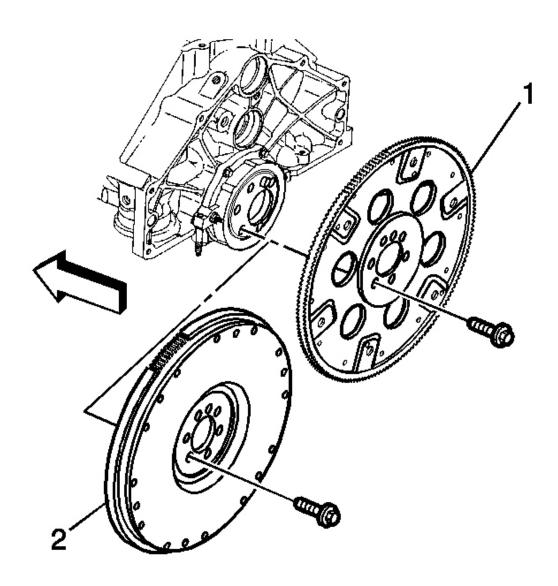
View Of Flywheels Courtesy of GENERAL MOTORS CORP.
